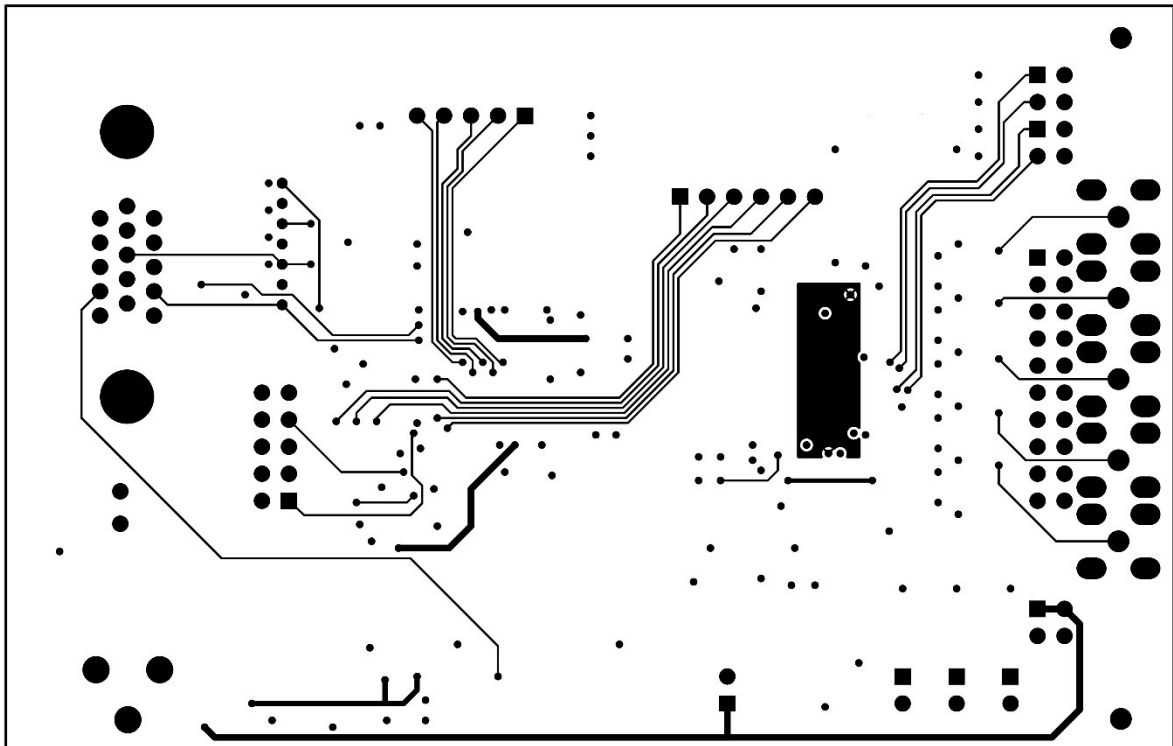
GPX2-EVA BOARD Layout: Assembly layer
